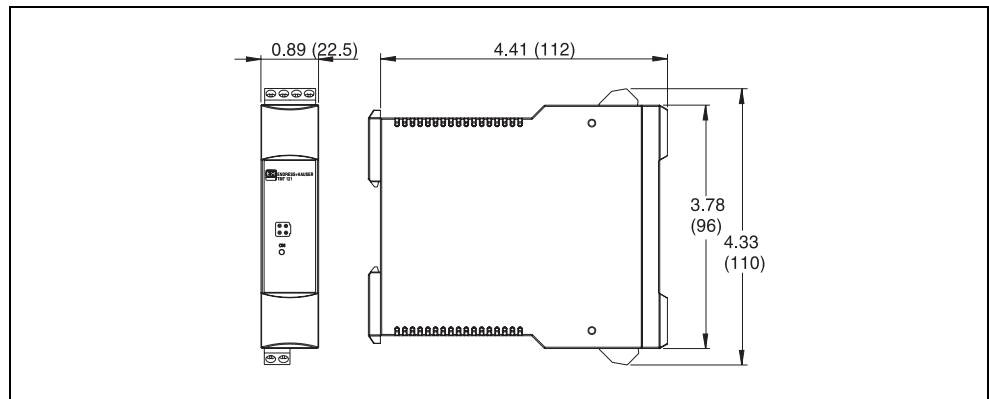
Dimensions of the DIN rail transmitter in inches (mm)
